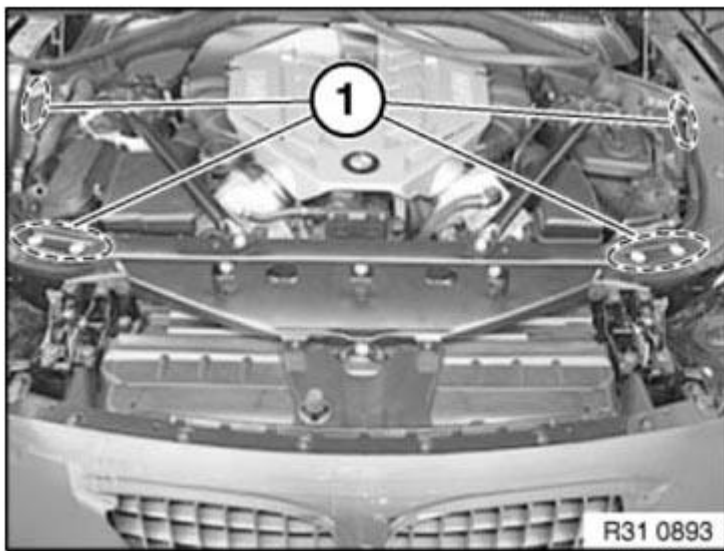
Identifying Contact Points Of Special Tool 00 6 050
